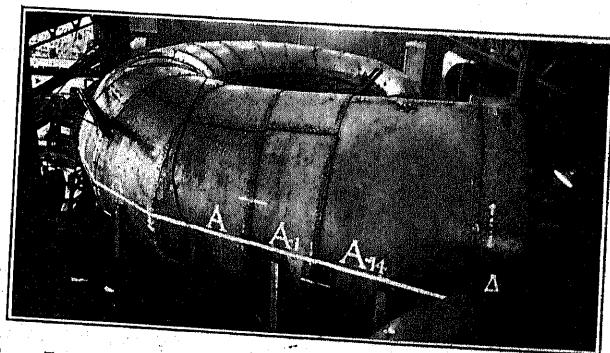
PLATE STEEL CIRCULAR SECTION SPIRAL CASING. ONE OF TWELVE 40,000 H. P. SINGLE-RUNNER VERTICAL SHAFT TURBINES FOR QUEBEC DEVELOPMENT CO., LTD.
